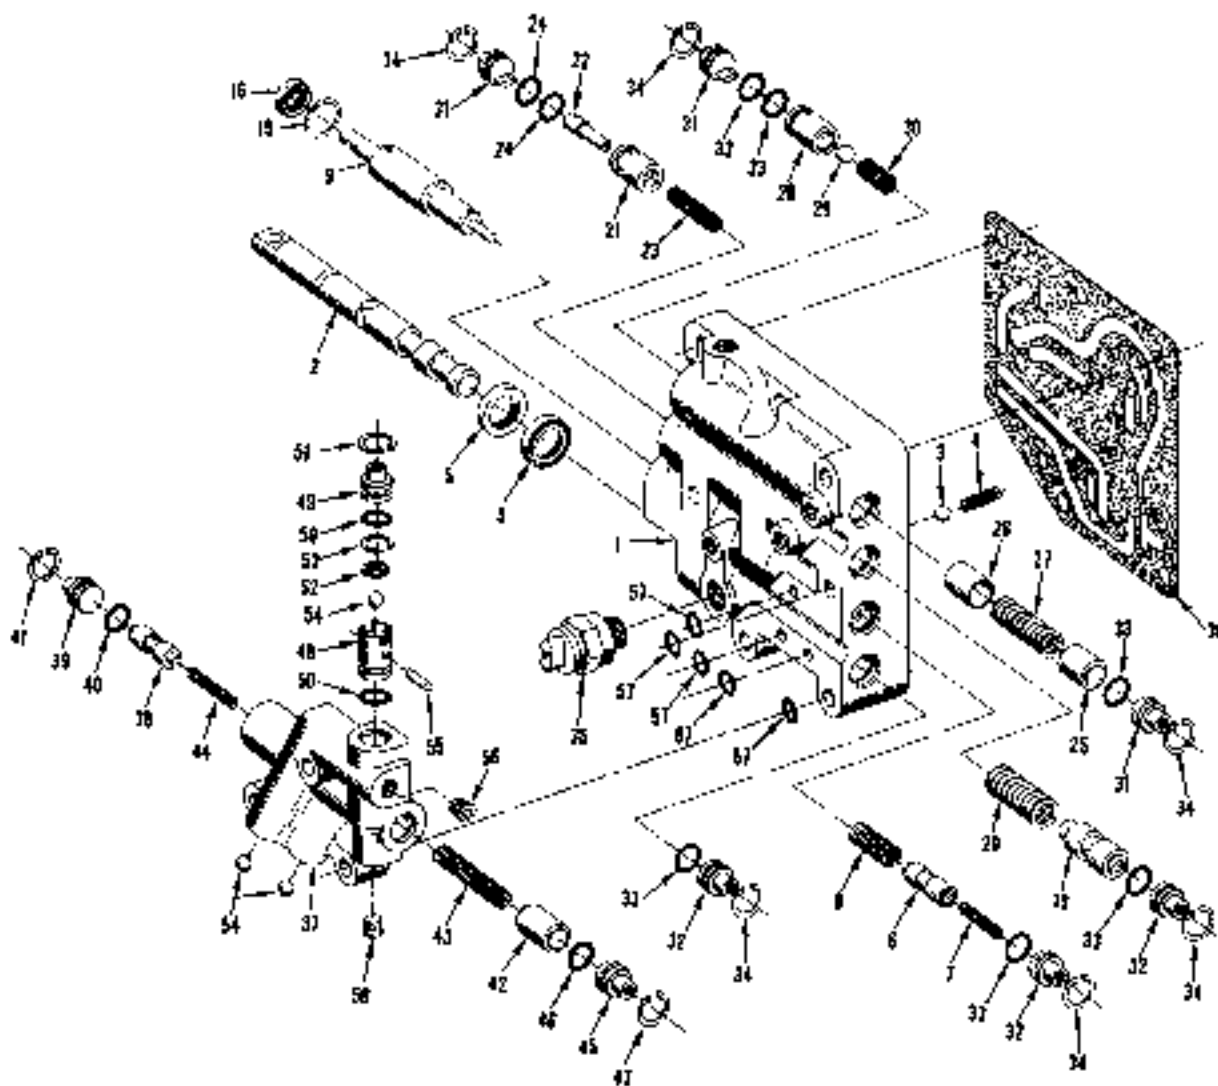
B - TRANSMISSION CONTROL VALVE AND REGULATOR
